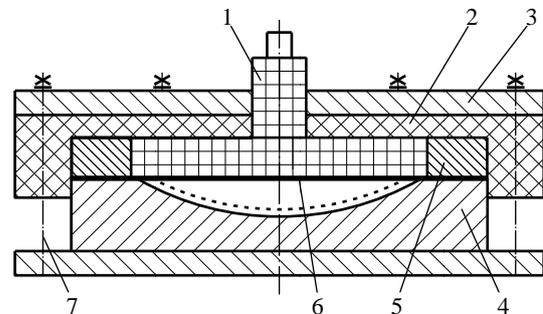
Scheme of experimental tools: 1- flat spiral coil; 2- wooden casing; 3- fixing plates; 4- forming die; 5- ring; 6- workpiece; 7- tightening screws
